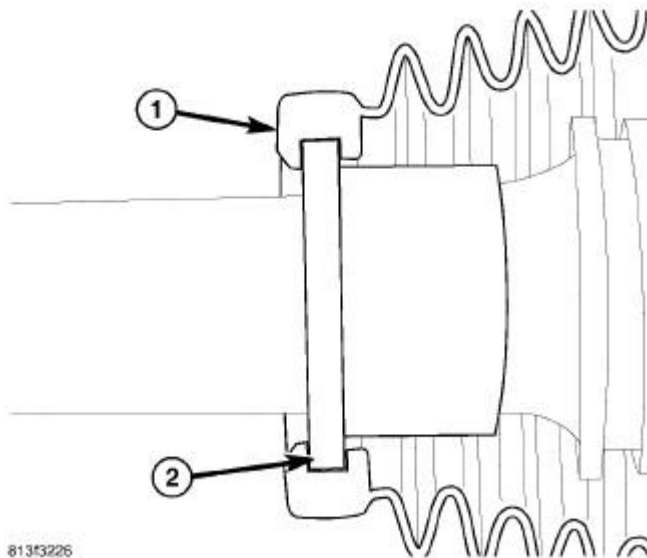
BOOT INSTALLATION OVER SHAFT COLLAR
